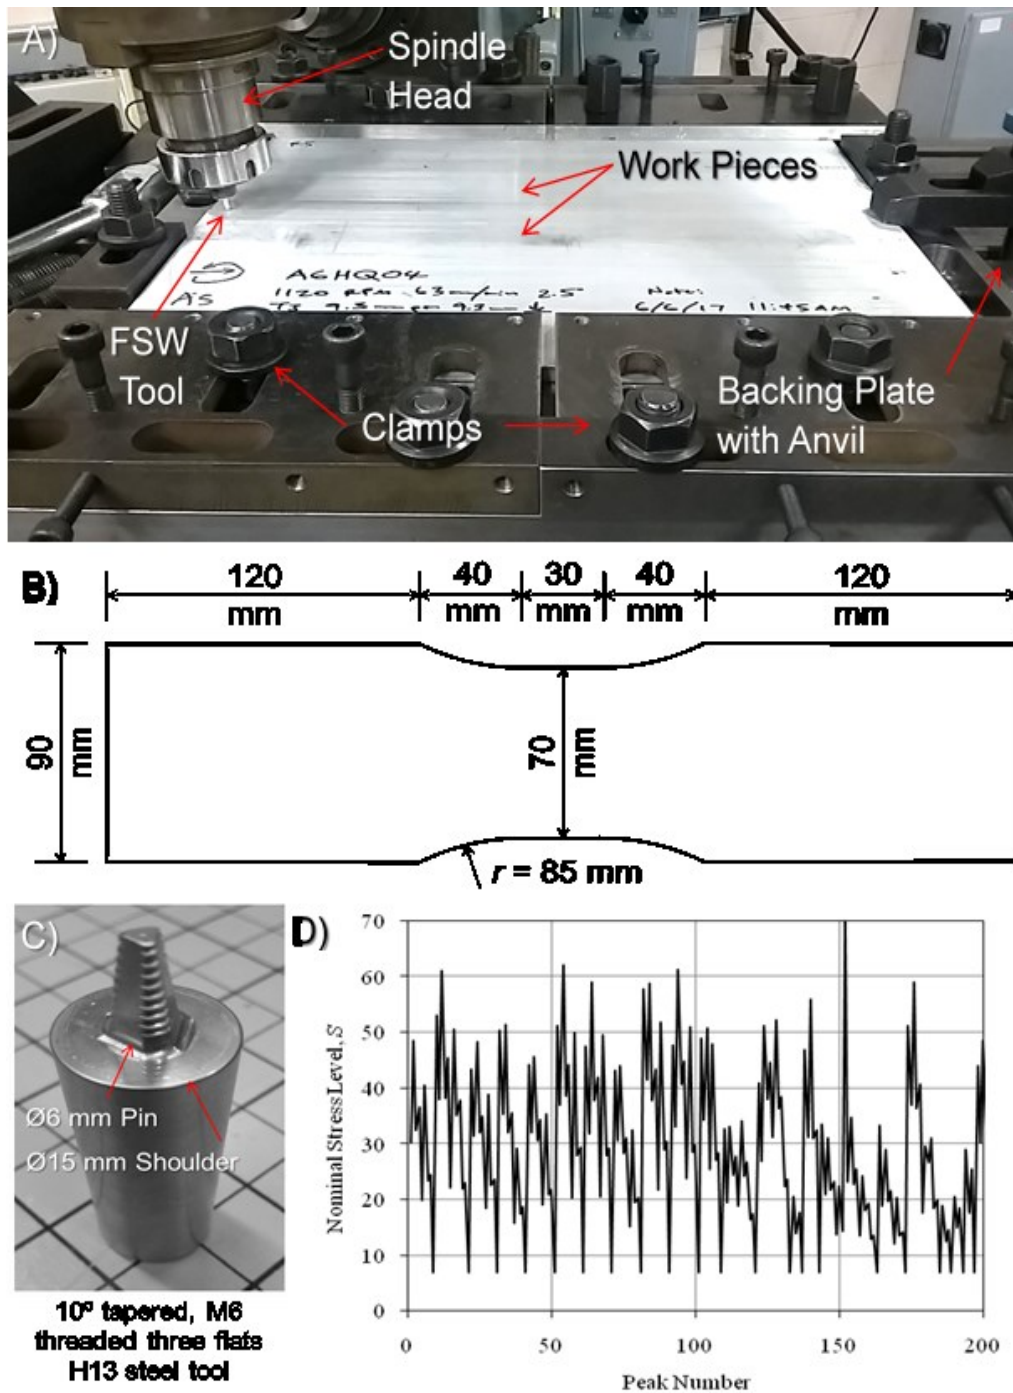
Specimen fabrication and loading details: (A) welding process setup, (B) specimen layout, (C) FSW tool, and (D) VA loading history
